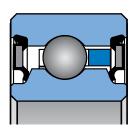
Double-Sealed Reali-Slim JG bearing
